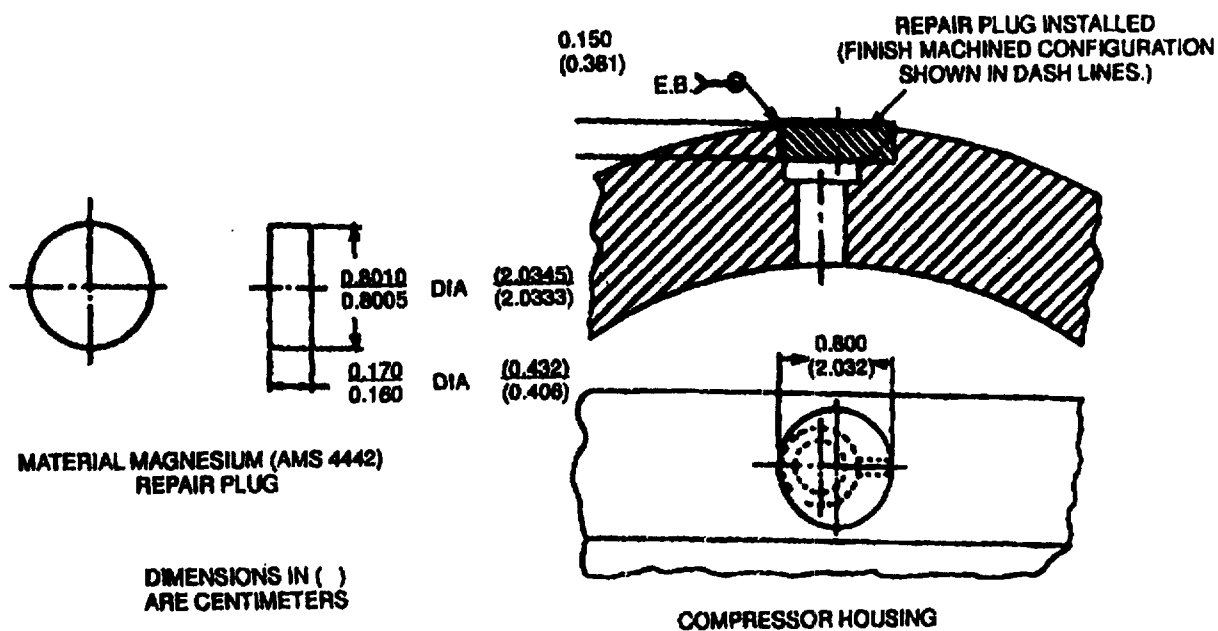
Compressor Housing Bolt Retainer Slot Machining and Replacement Plug.
